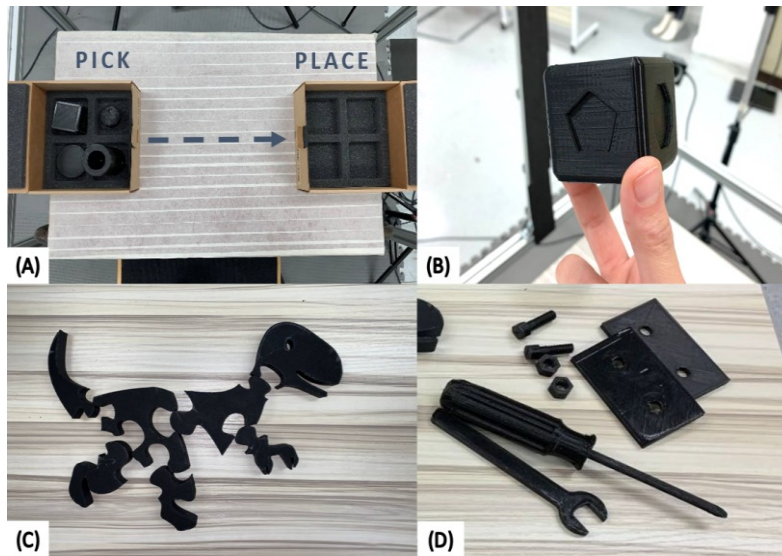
Industry tasks. (A) The two boxes used for pick-and-place. (B) The cubic object to observe during object inspection (C) A seven-piece puzzle to be assembled during the hand assembly task. (D) Assembly components and tools for the last task.
